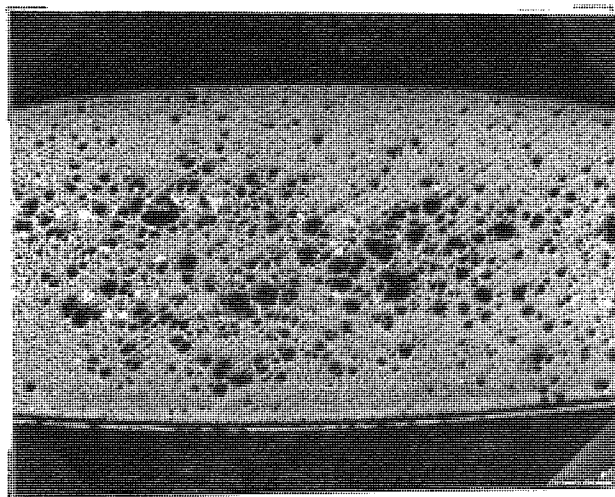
Cross section of AZ71HC knife showing porosity in the casting. (X30)
